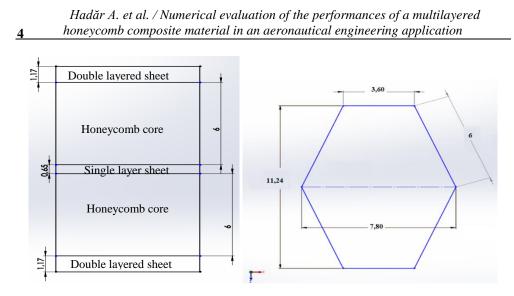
Multilayered honeycomb composite material geometrical dimensions.
